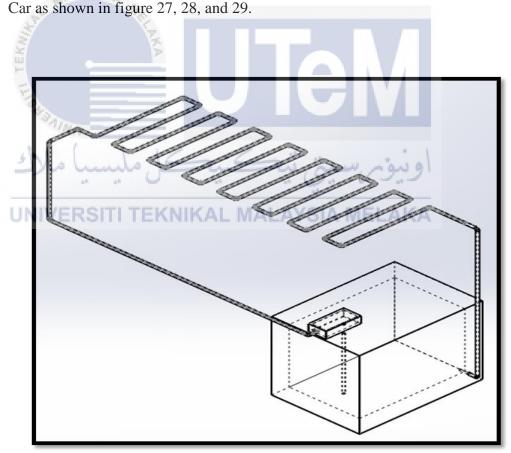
Picture of Isometric Cooper Tube Installation on Upper Side of Car.
